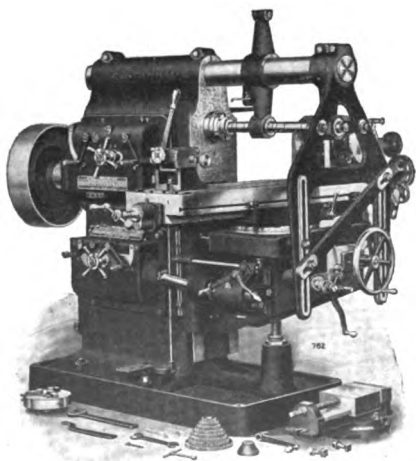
THE CINCINNATI UNIVERSAL MILLER
